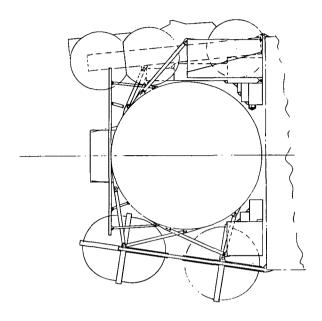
Final Version Configuration 3B Outboard Equipment Structural Arrangement
